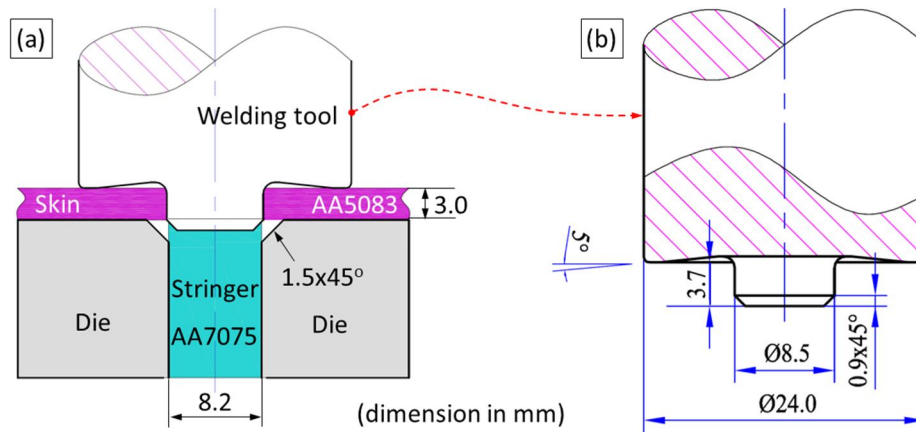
(a) Schematic view of FSWed T-lap joints and (b) dimension of welding tool.
